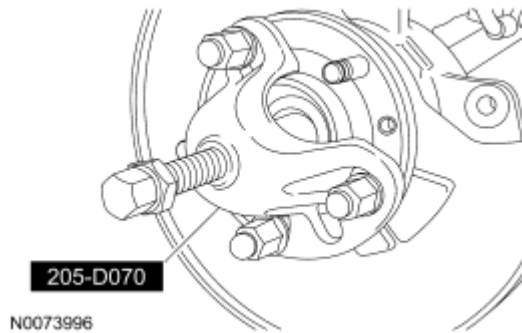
Separating Halfshaft From Wheel Hub Using Special Tool (205-D070)
